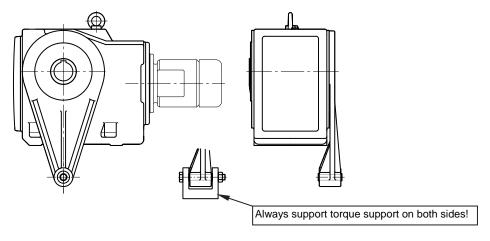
Attaching the torque support on bevel gear and worm gear units
